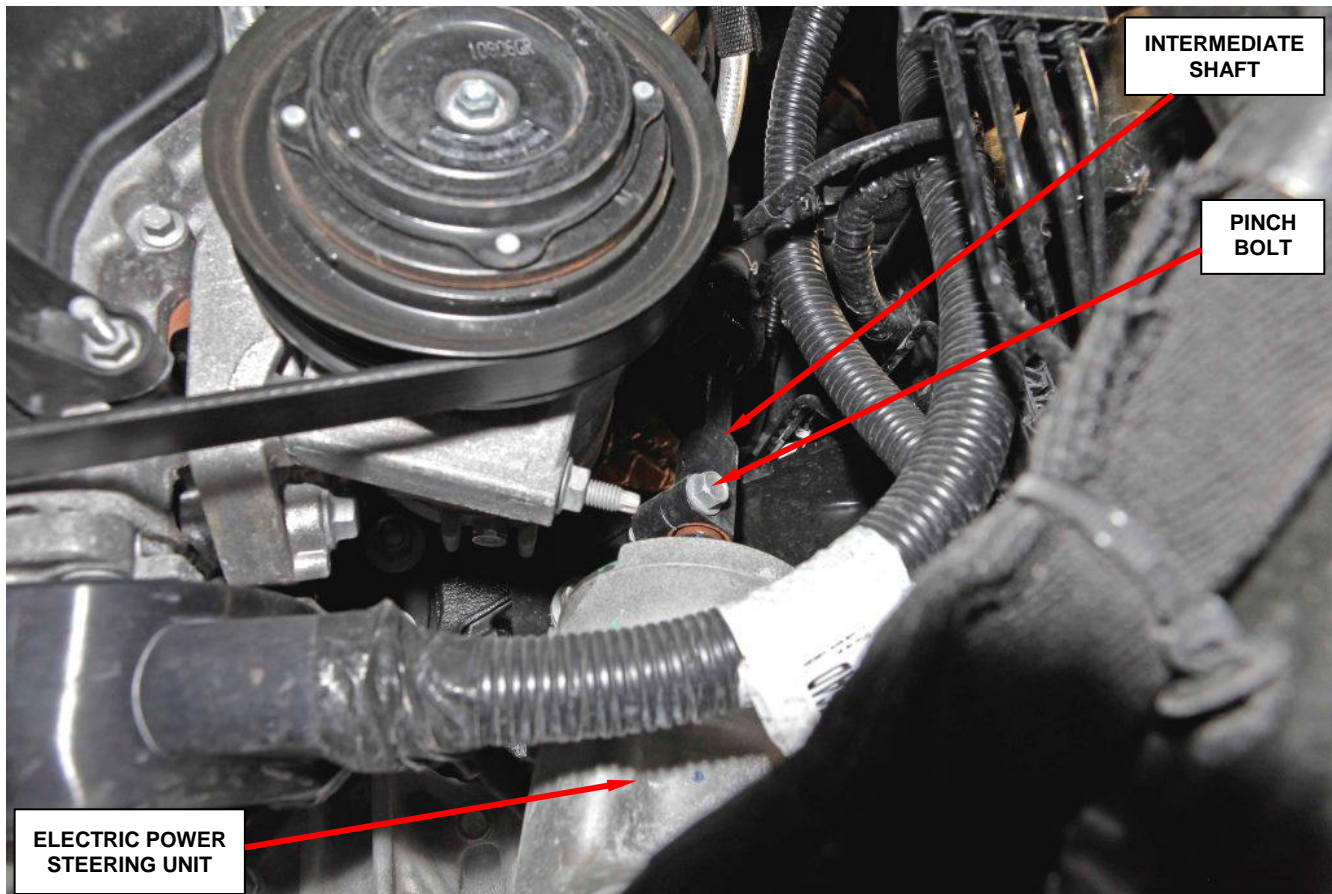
Steering Column Shaft-to-Electric Power Steering (EPS) Unit Shaft Pinch Bolt
